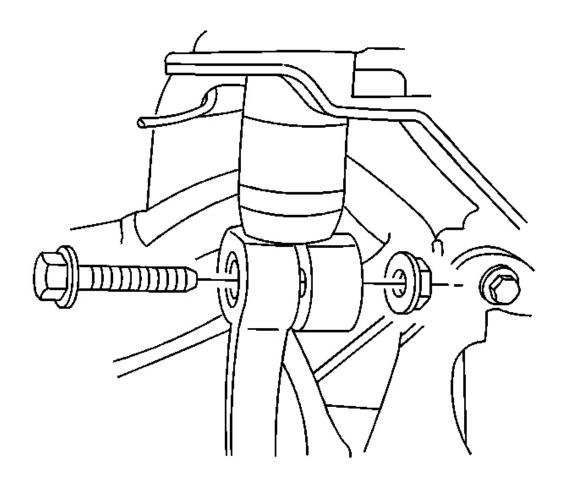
View Of Shock Module Yoke To Shock Absorber Pinch Bolt & Nut Courtesy of GENERAL MOTORS CORP.
